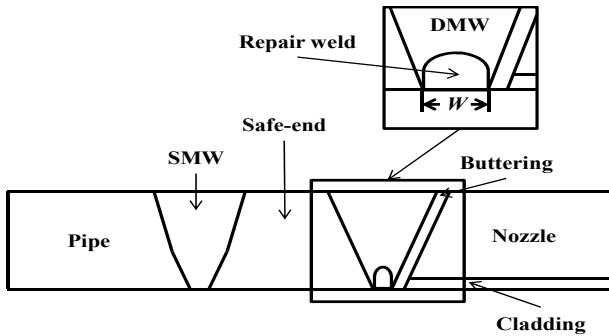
Geometry of dissimilar metal butt weld considered in the present study
